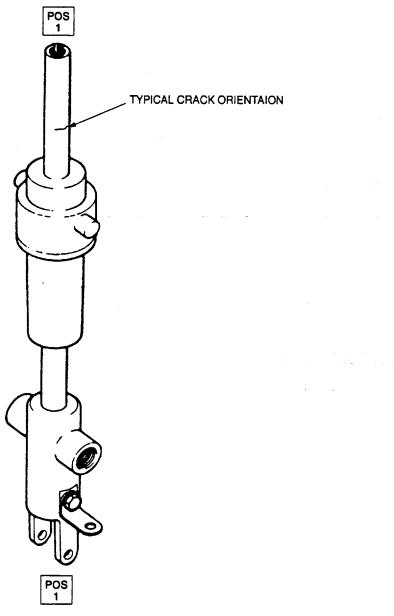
Tail Rotor Hydraulic Power Cylinder - Piston Rod 6-70
